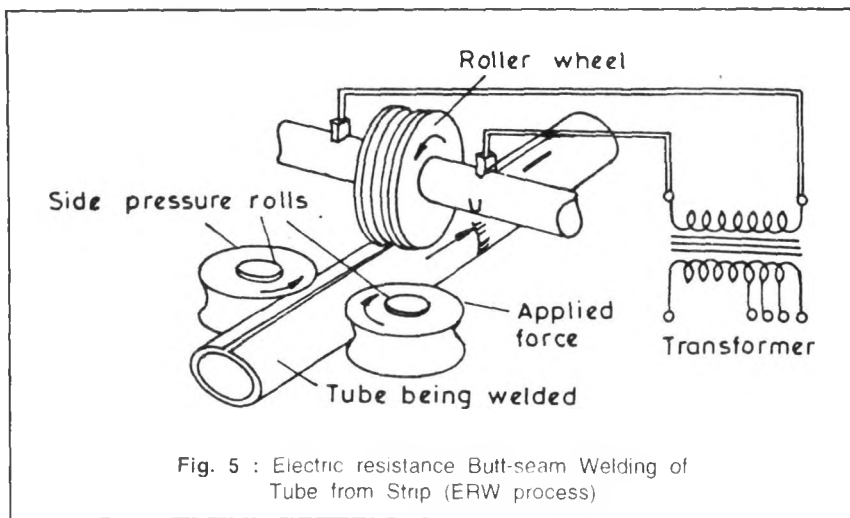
Electric resistance Butt-seam Welding of Tube from Strip (ERW process)
